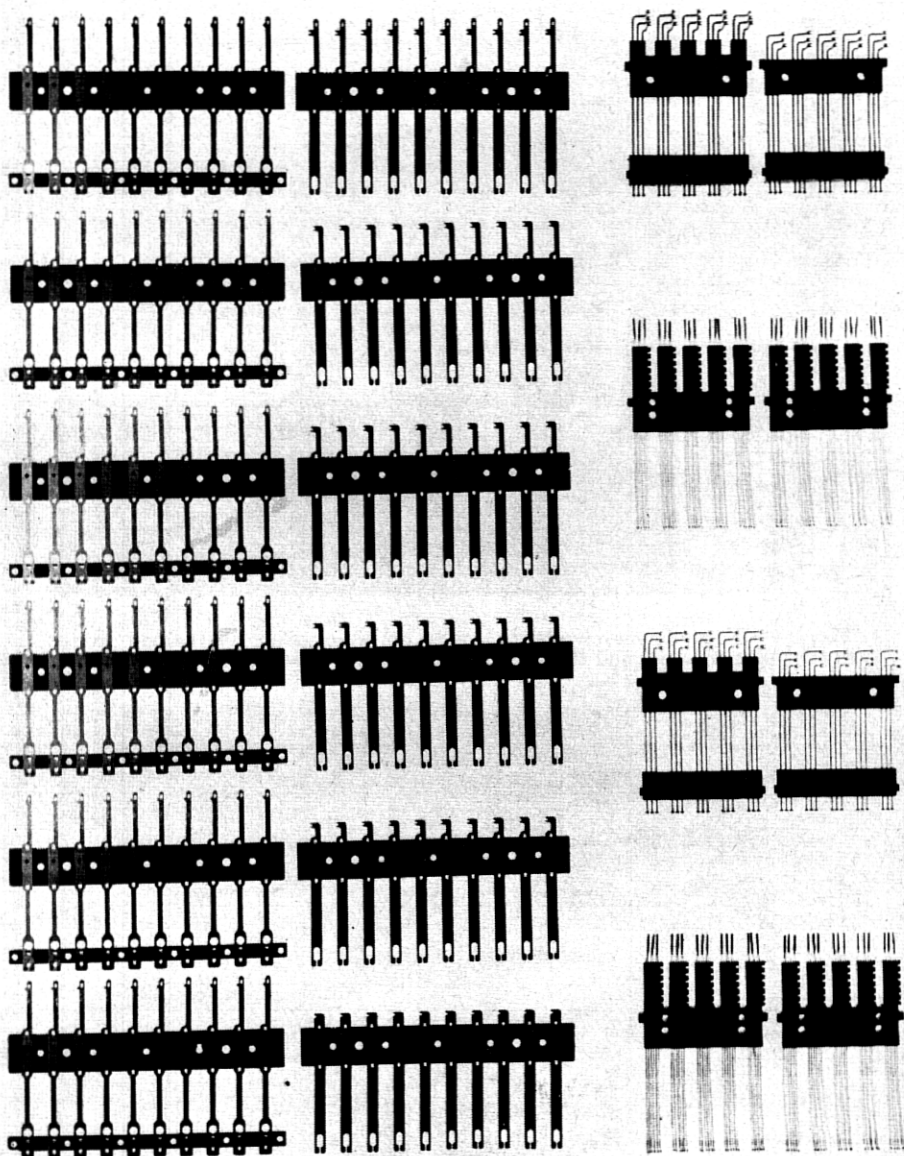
A comparison of molded wire assemblies for a 60-contact replacement relay with the corresponding flat spring relay parts.
